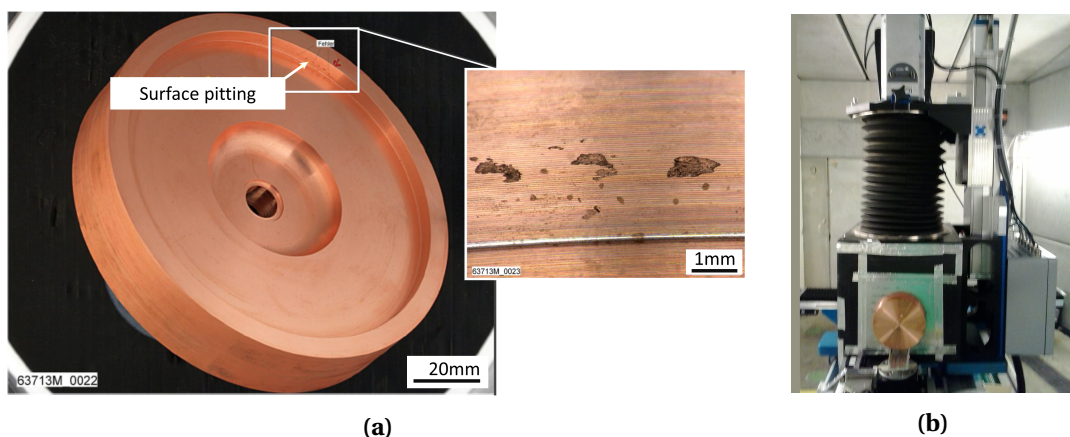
Copper cavity segments showing surface pitting after machining (a) and neutron radiography set-up of a pristine forged copper disc (b).
